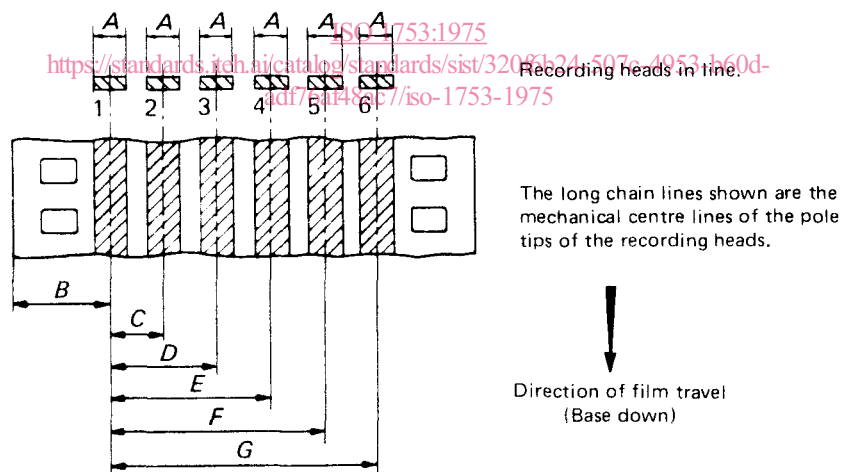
FIGURE — Location and dimensions of the magnetic sound recording head gaps
